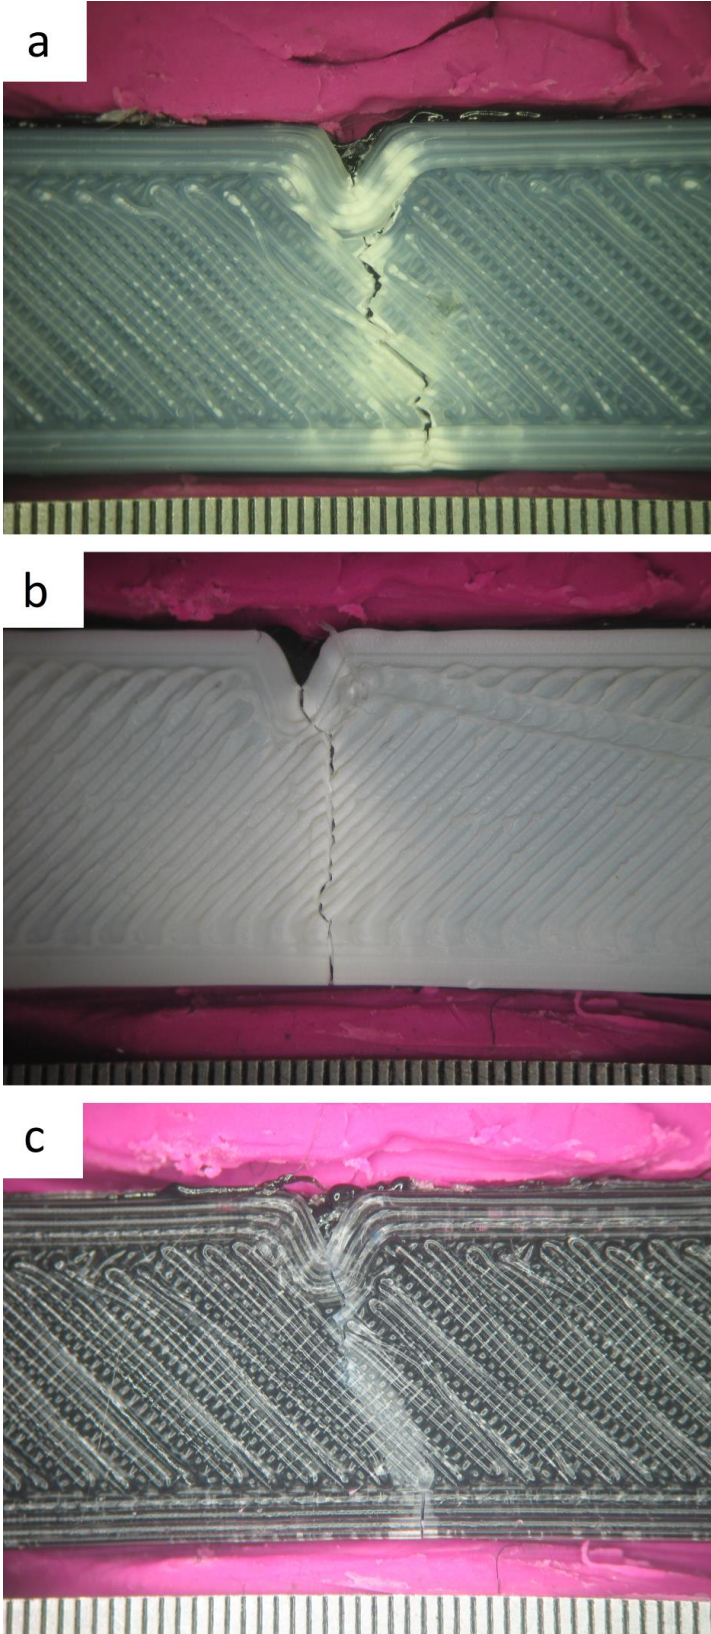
Morphology of the damage and fracture after impact on printed multi-material sandwich specimens: a) ABS-TPU-ABS; b) HIPS-TPU-HIPS; c) PMMA-TPU-PMMA. Step is 1 mm.
